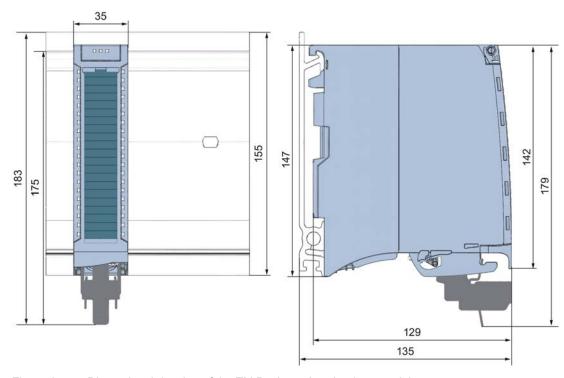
Dimensional drawing of the TM PosInput 2 technology module
